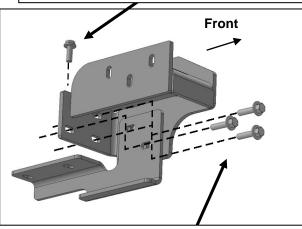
Attach driver/left Support Bracket to threaded holes (tow hook) in bottom of frame
